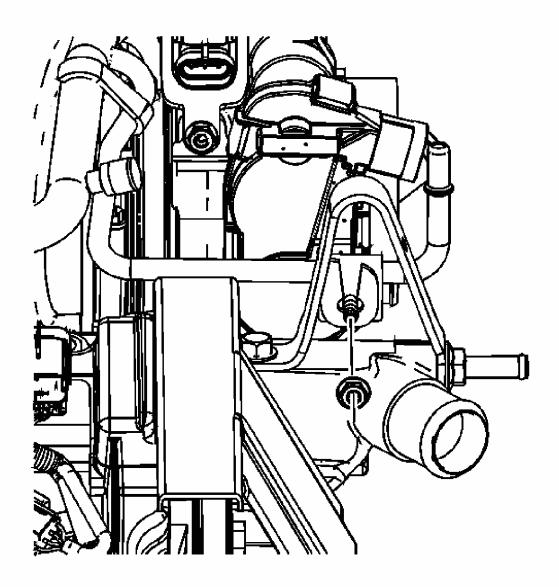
Identifying Fuel Rail Bracket Courtesy of GENERAL MOTORS CORP.
